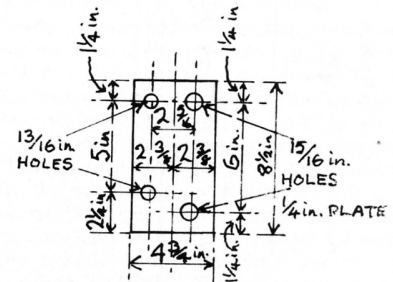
WASHER PLATE TO TRIMMER KNEE & AXLEGUARD
